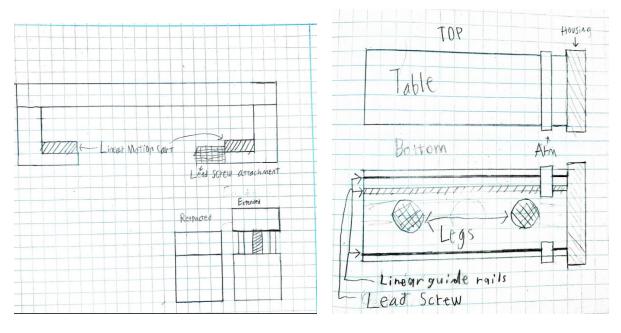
Physical design sketches; Arm Assembly (left) and Arm Mounted to Table (right)
